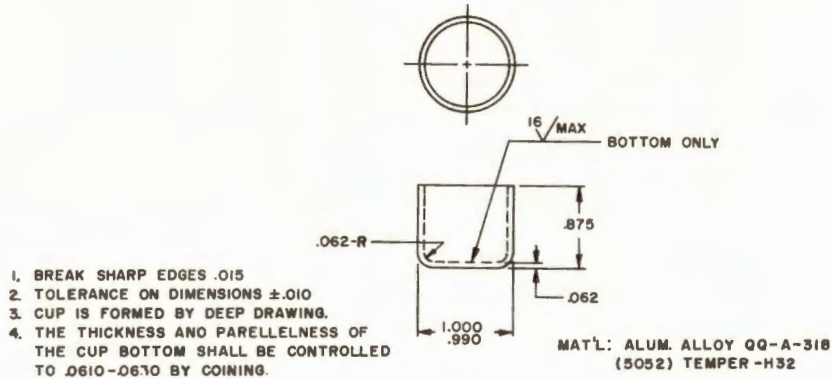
SPECIMEN CUP FOR IMPACT TESTER
